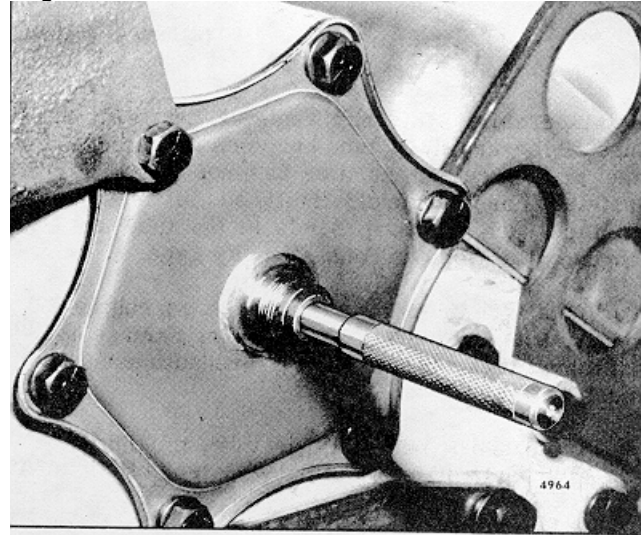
Checking Tachometer Drive Shaft Alignment
